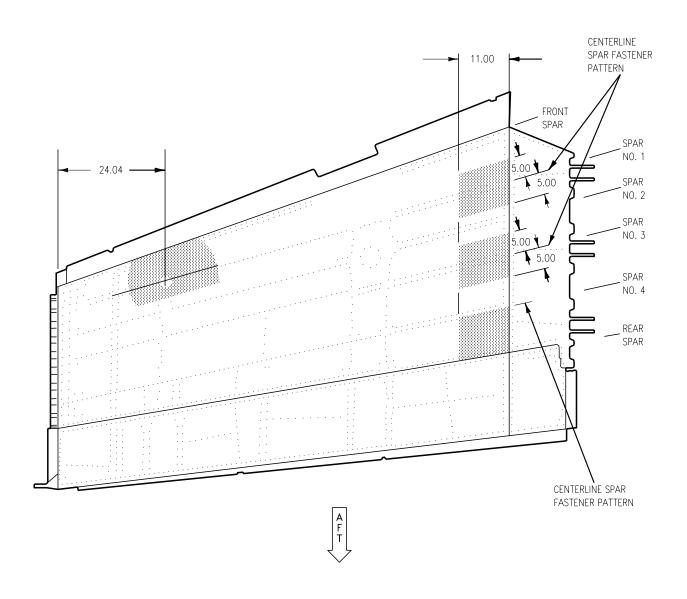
Inner Wing Upper Surface Titanium Splice Fitting Inspection Areas (Sheet 1)
